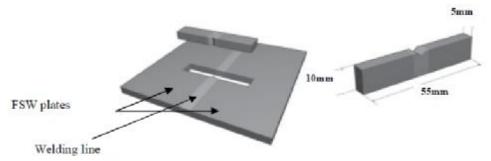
Scheme of the machining of the V-notch Charpy specimens from the FSW plates and dimensions of the sub-size specimens used in this work.
